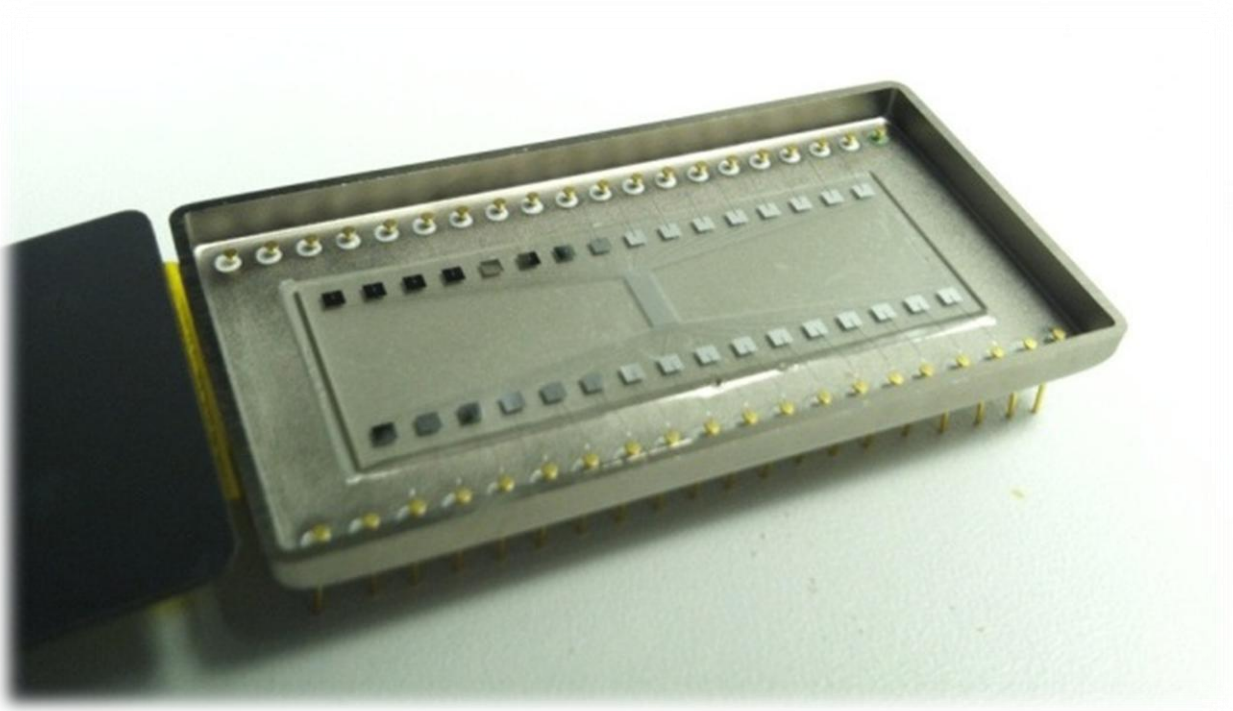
Separation electrode chip after dicing, attachment to a dual-inline package and wire-bonding
